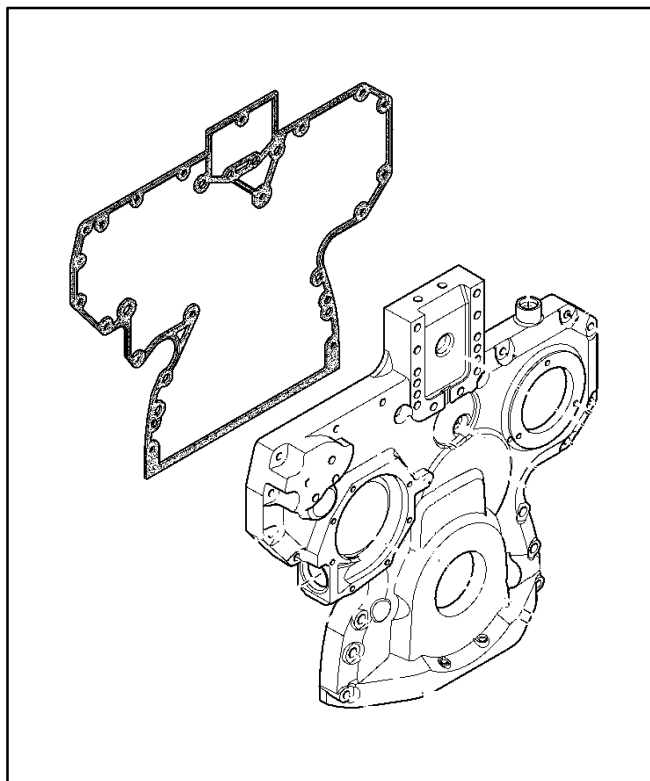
TIMING GEAR COVER AND GASKET
